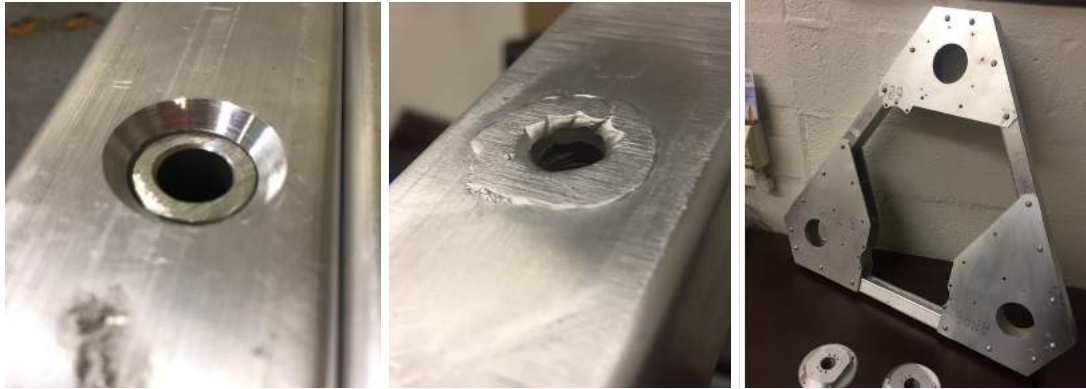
Crush Tube Pre Welding (Left), Post Welding (Center), Assembled (Right).
